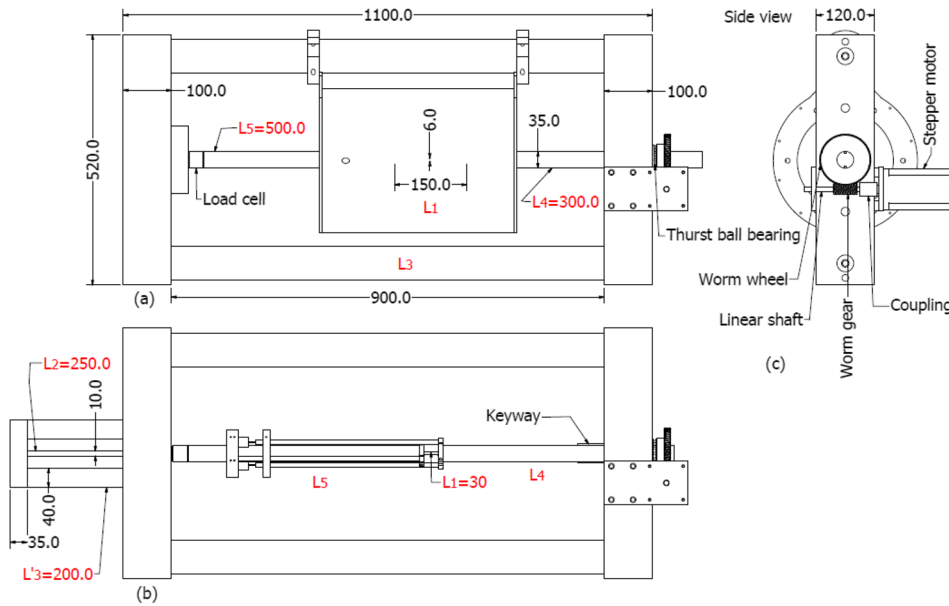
Schematic drawings of the ENGIN-X rig frame and loading system; (a) design for  $Z \sim 1.2$  with a 150 mm gauge length and a 6 mm diameter test sample; (b) design for  $Z \sim 10.5$  using a new specimen (length 30 mm, diameter 7 mm) coupled to an aluminium round bar specimen (length 250 mm, diameter 10 mm); (c) the connection of the stepper motor, coupling, linear shaft, worm gear, worm wheel, thrust ball bearing, and keyways.
